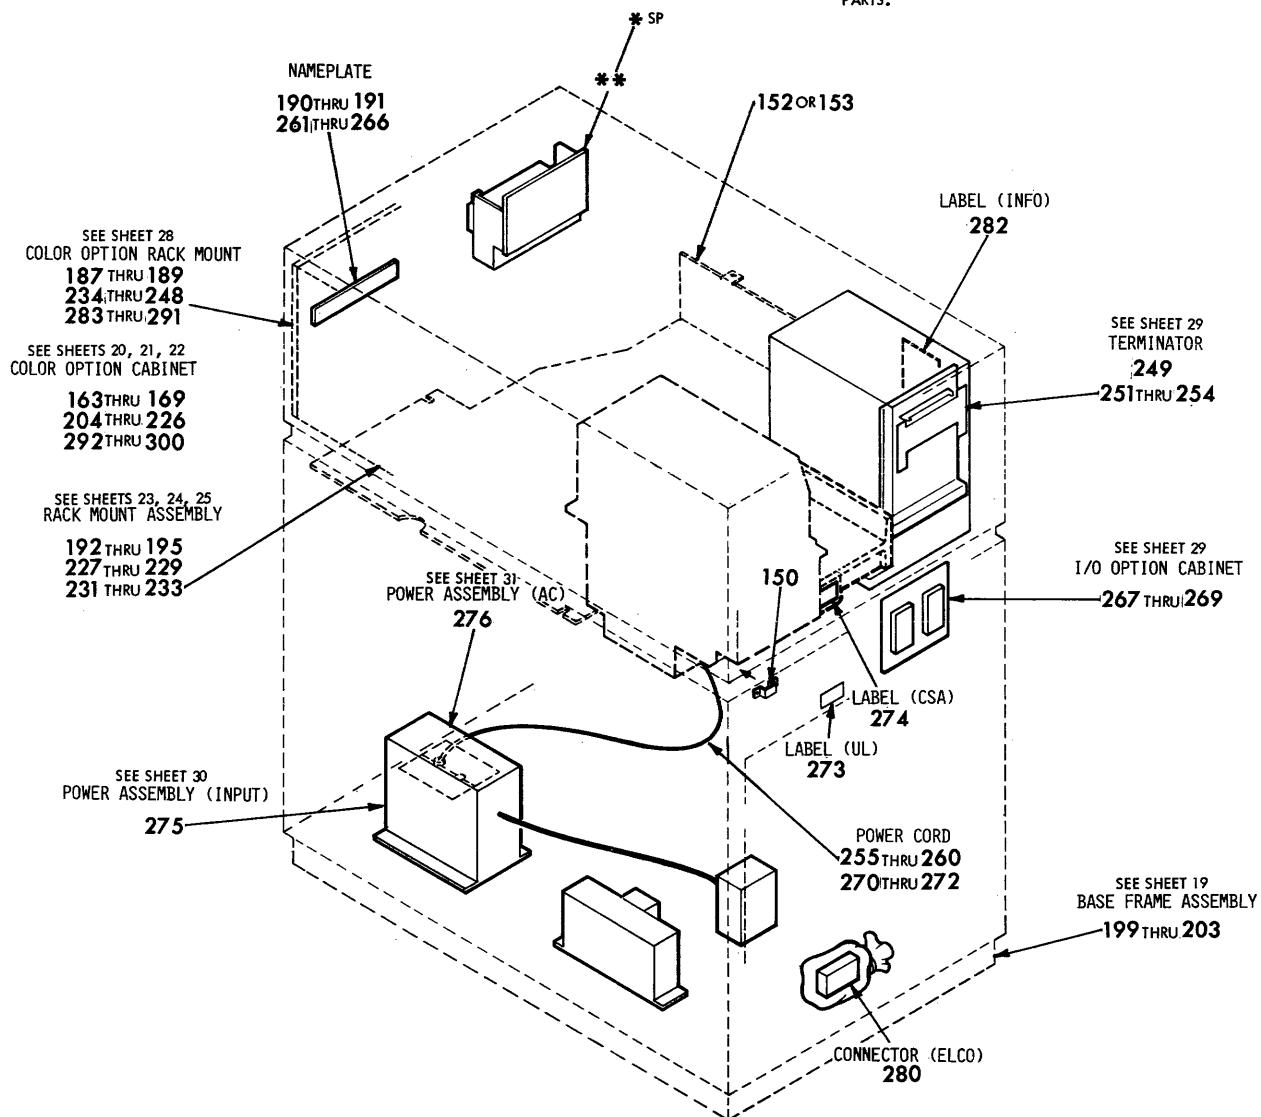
TOP MECHANICAL ASSEMBLY
